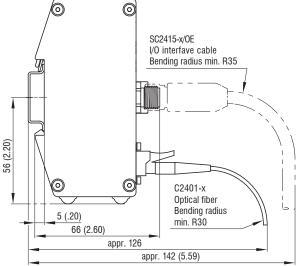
IFC2411 dimensional drawing, dimensions in mm
